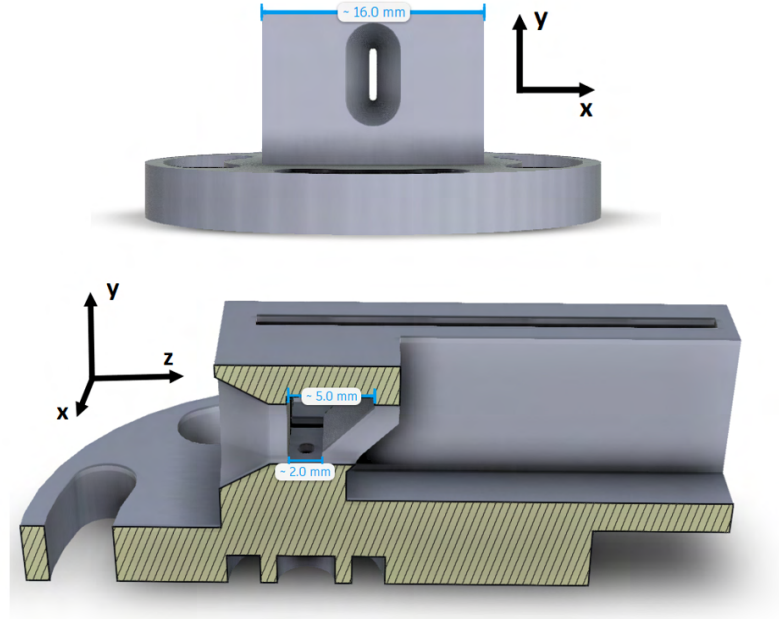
This figure shows two perspectives of the CAD drawings for gas cell 2. The front view shows the slit through which the laser pulses enter. The side view presents a cross-section in which the inside of the chamber can be seen. The long slit on top of the gas cell is there for the insertion of a glass window for probing purposes. The laser propagation direction is towards the right (increasing z values).
